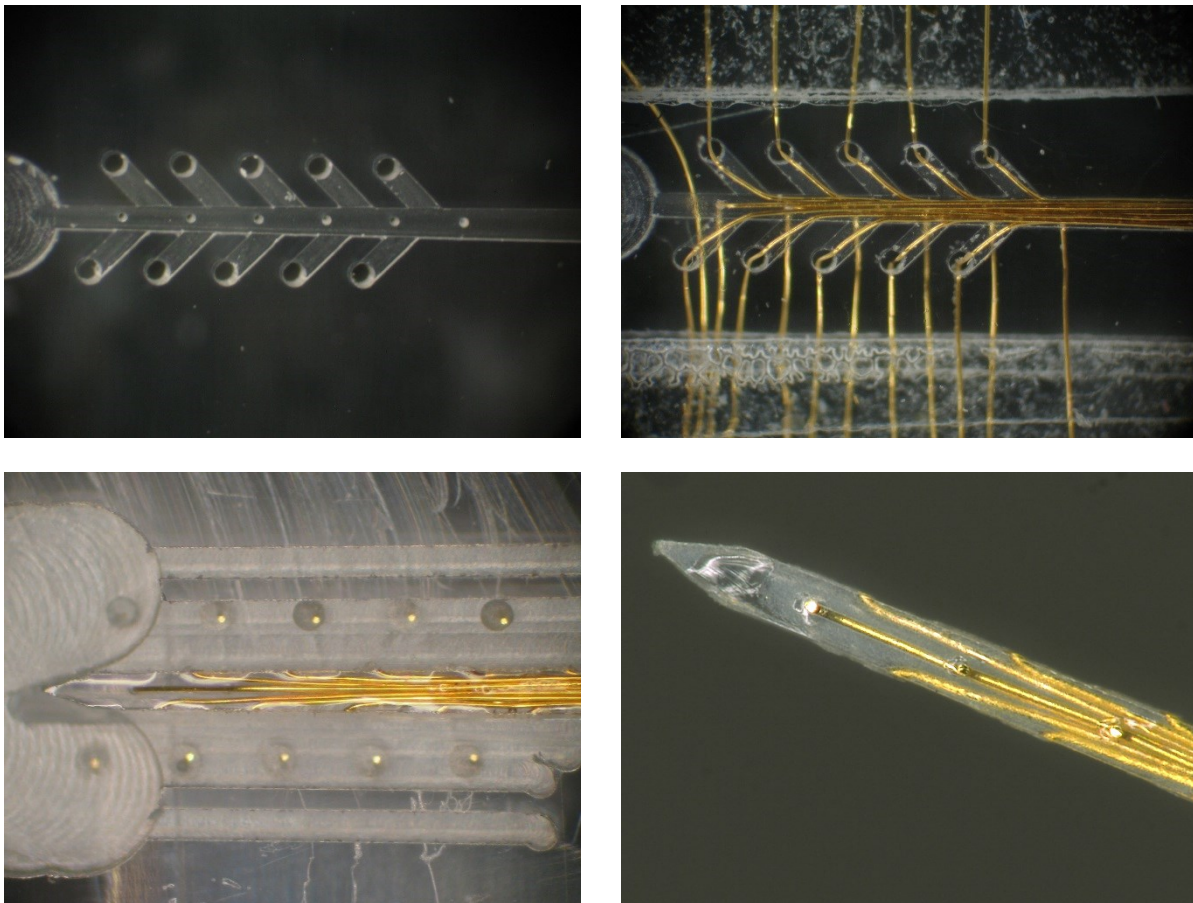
Three-Sided MEA. Shown are the PMMA micromold, micromold assembled with 25  $\mu\text{m}$  wires, post casting machining of wire ends and tip, and completed electrode after sacrificial release.
